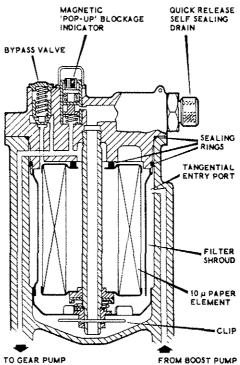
Fuel Filter - Rolls-Royce Gem Engine
